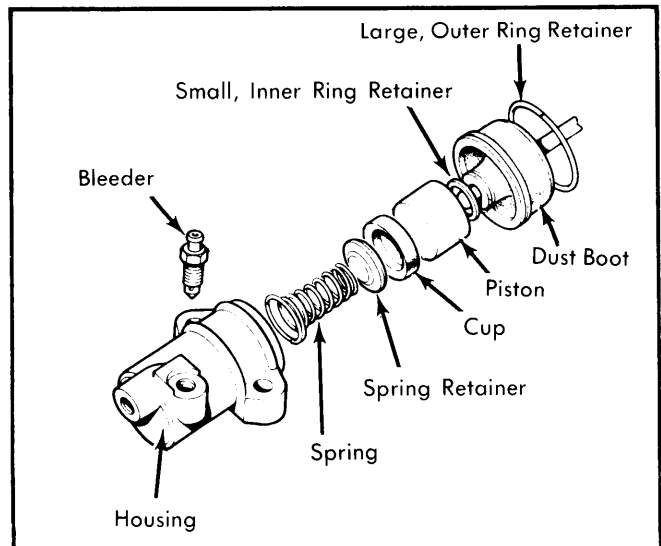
Exploded View of MGB Clutch Slave Cylinder
